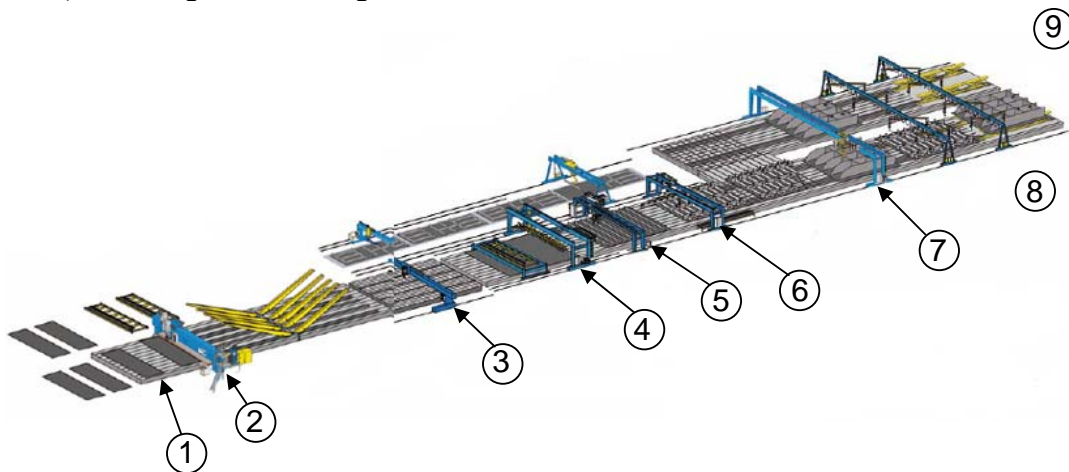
Panel-block assembly line [26], [27], [28]
